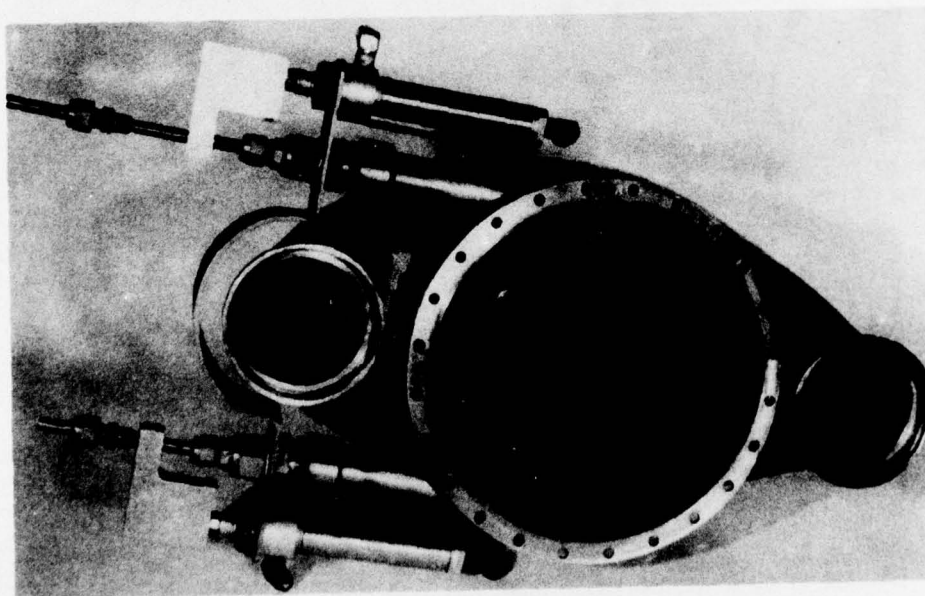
Modified Conventional Combustor Assembly, Internal View.
